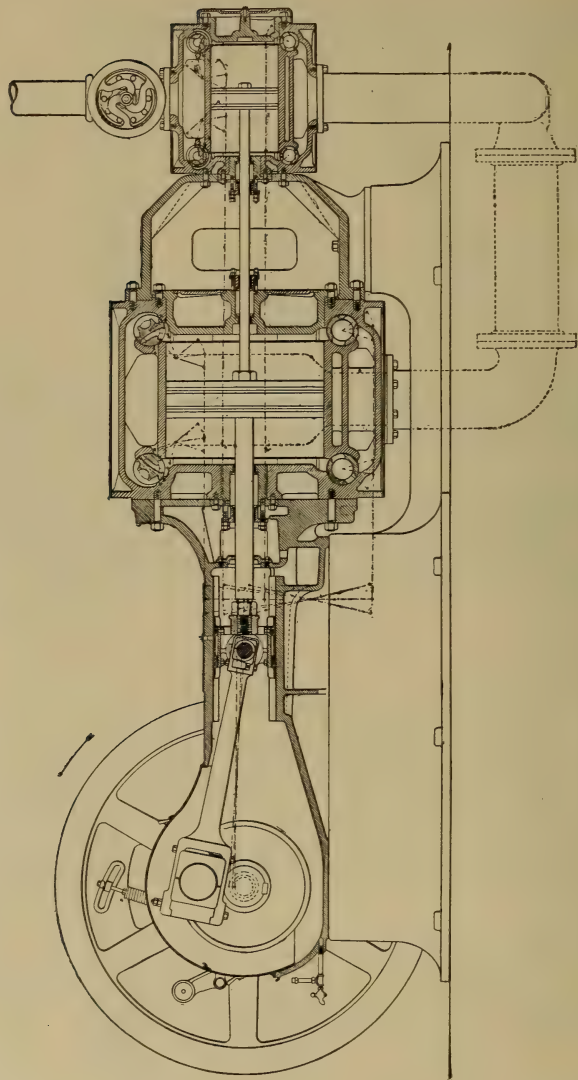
Fleming-Harrisburg Four-valve High Speed Tandem Compound Engine.
